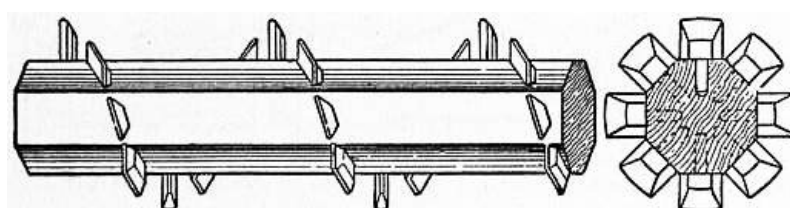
Early Flour Mill Conveyor.<sup>1</sup>
